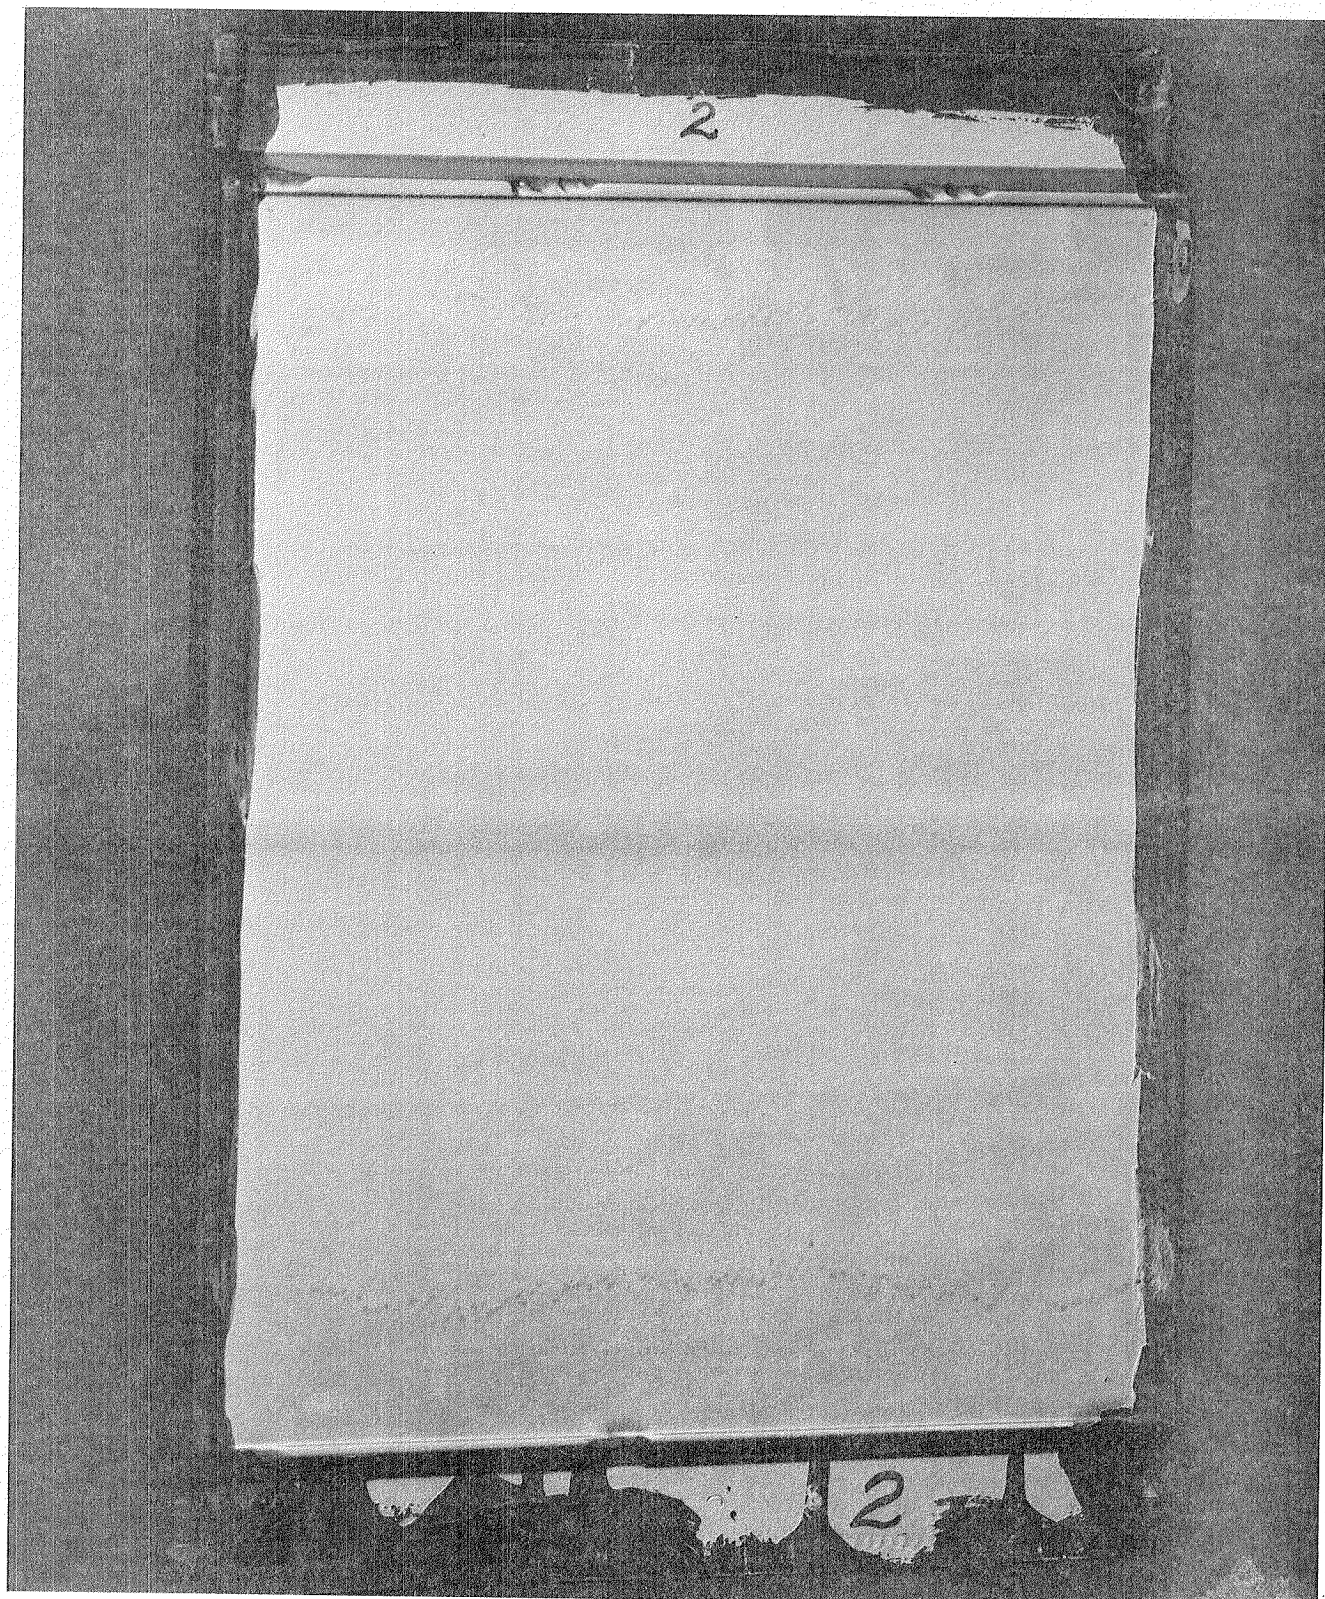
PANEL NO. 2 BOTTOM FACE SHEET AFTER CHEMICAL MILLING
